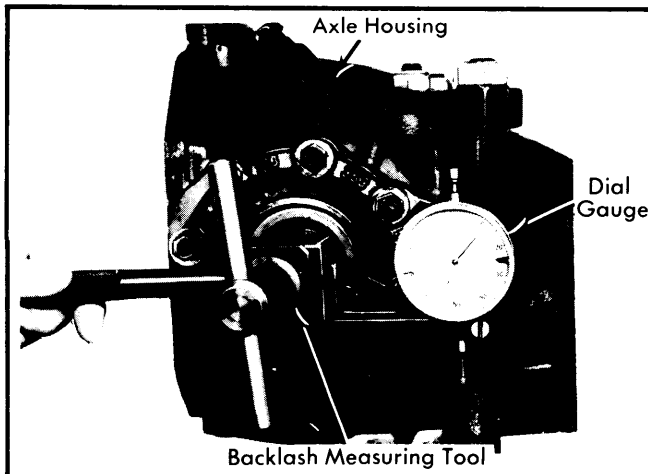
Measuring Ring-to-Pinion Gear Backlash
